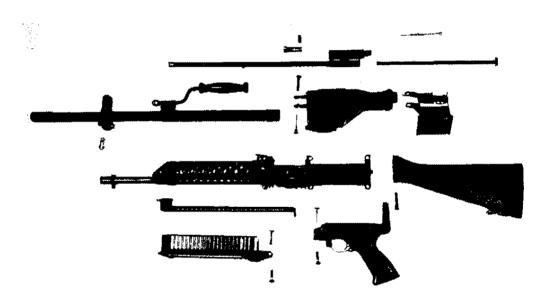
LIGHT MACHINEGUN - FIELD STRIPPED
